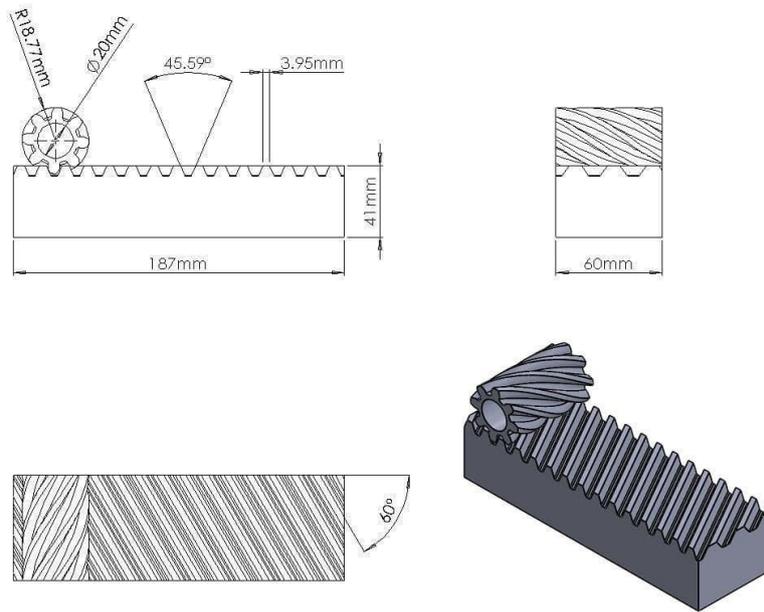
Shows the three projections and the final structure of the single helical gear (pinion) and rack
